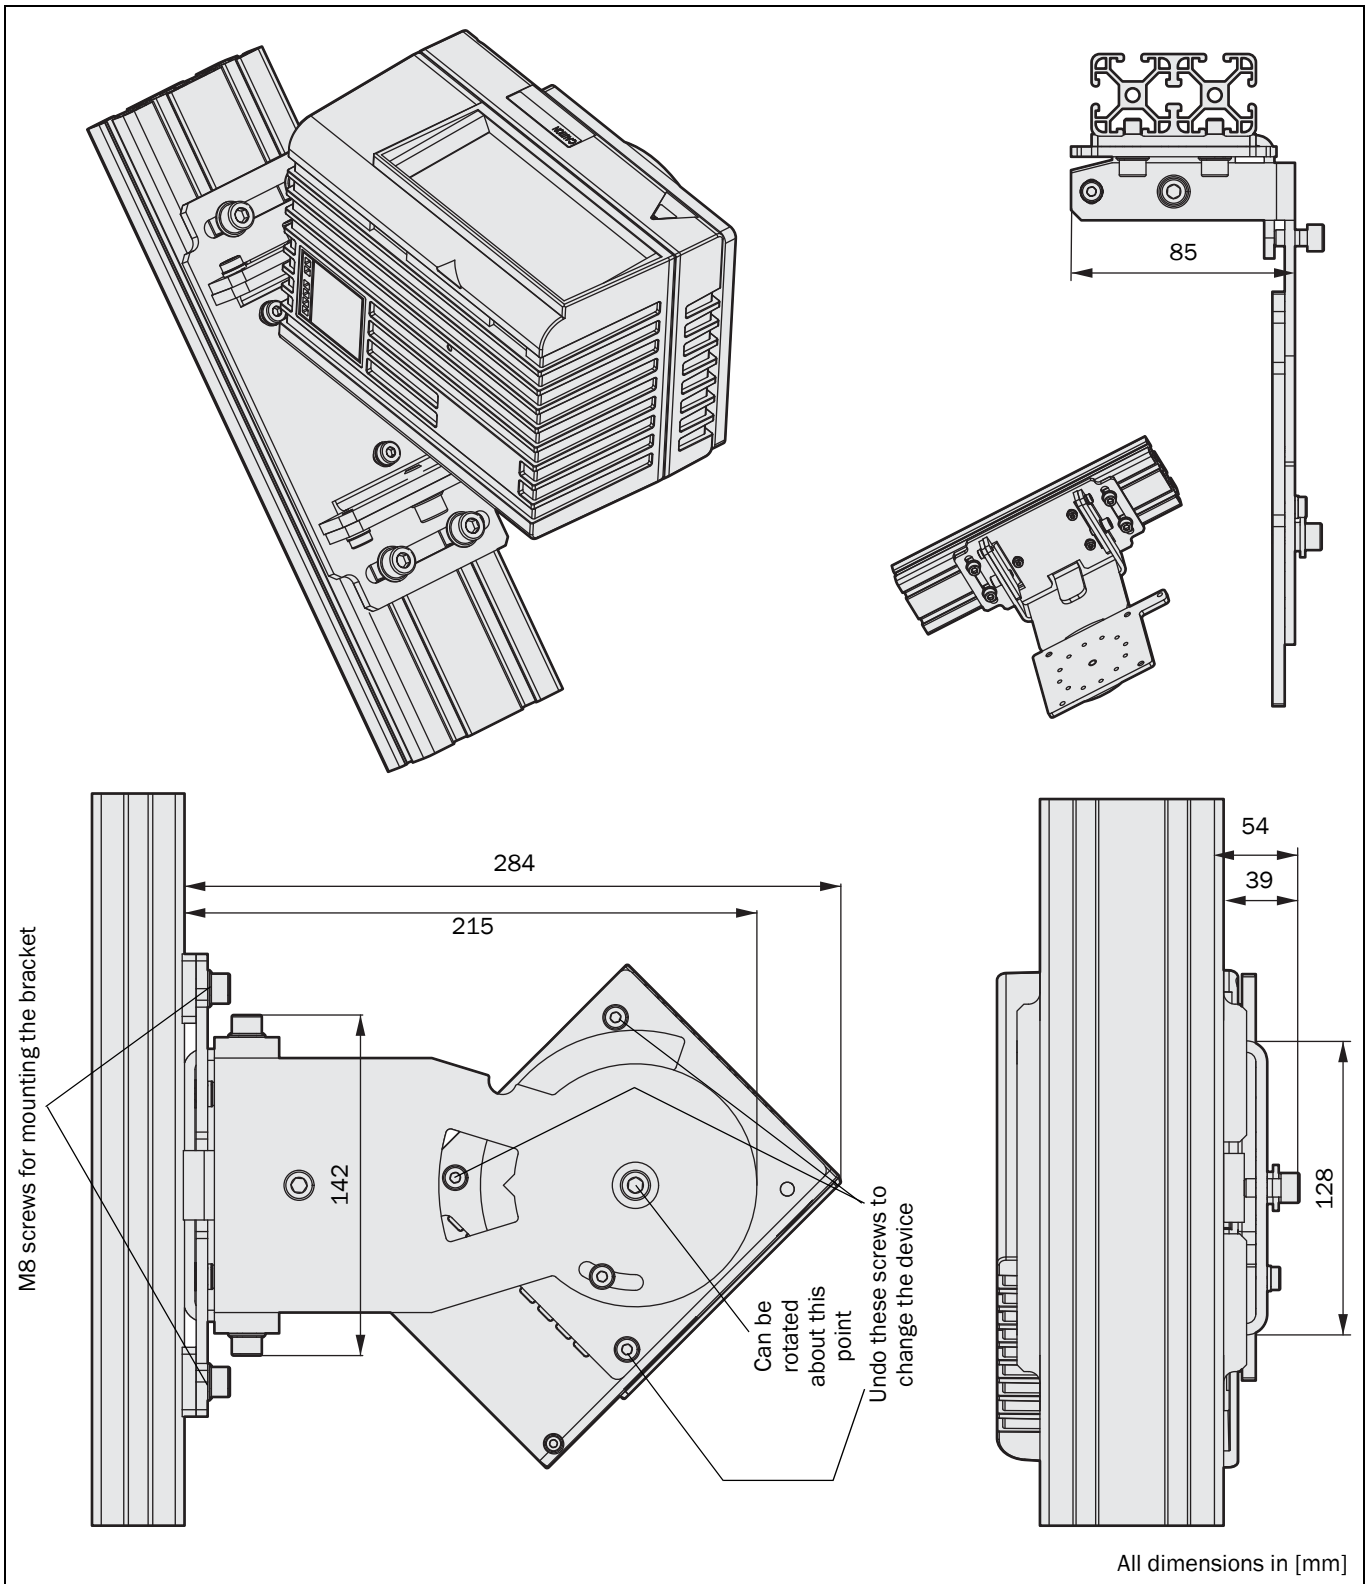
Dimensional drawing mounting kit for LMS400 laser measurement sensor
